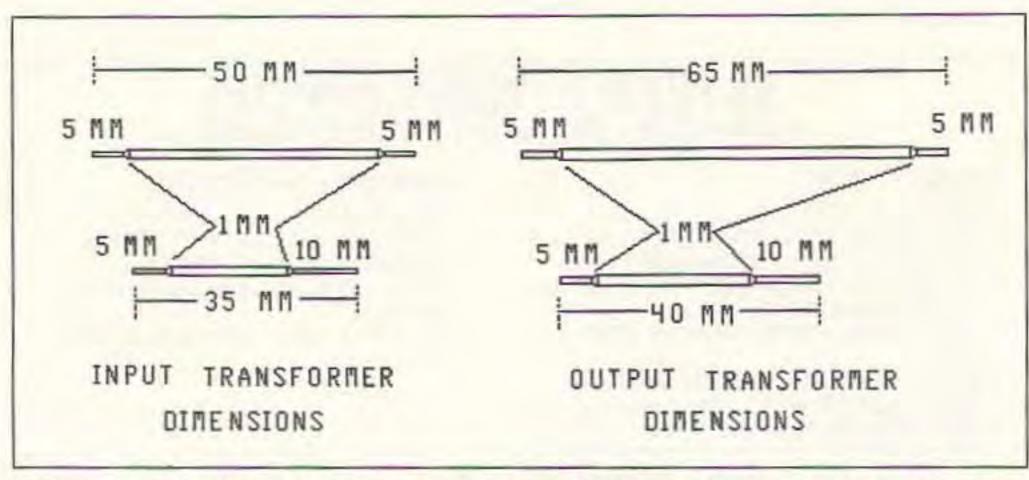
Preparation of the transformer coax. Cut the transformers to the lengths shown, and strip the outer conductors. The inner leads that are to be 5mm should have their outer conductors stripped 6mm and the leads that are to be 10 mm should be stripped 11mm. Then strip the insulator that goes between the inner and outer conductors, leaving 1mm of insulator as shown, which will leave the inner conductors bare at the proper lengths.
